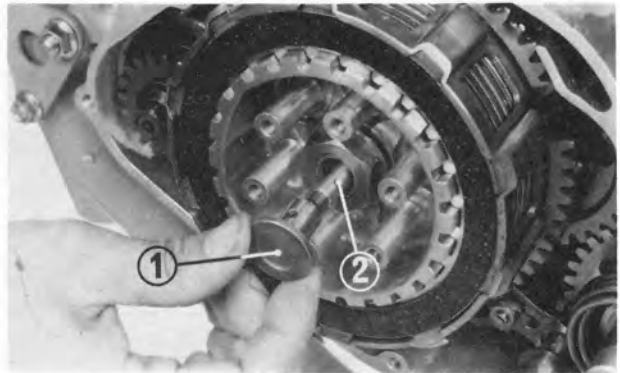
(1) Clutch lifter (2) Clutch lifter rod
